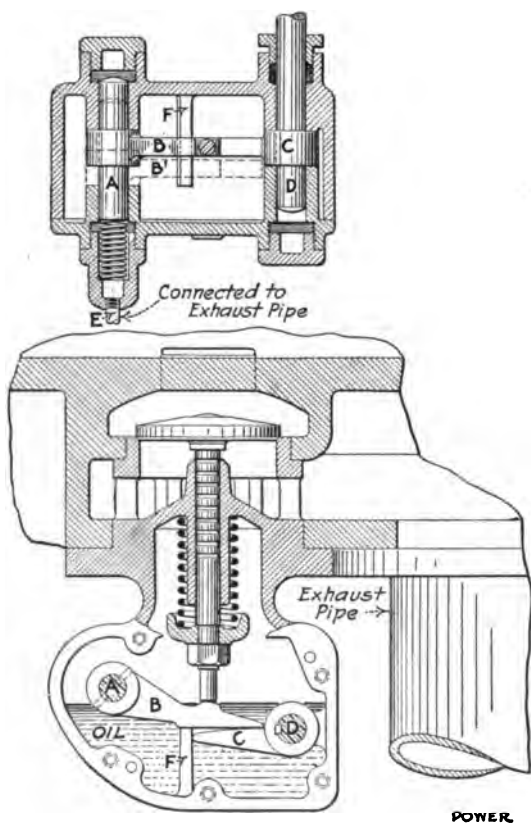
SEC. 3.—Gear for Skinner auxiliary exhaust valves
